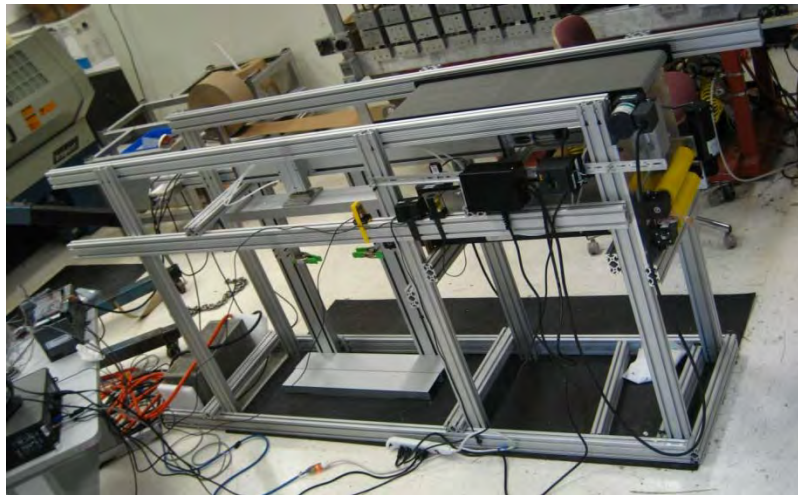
Photograph of the frame assembled from heavy duty Aluminum extruded profiles
